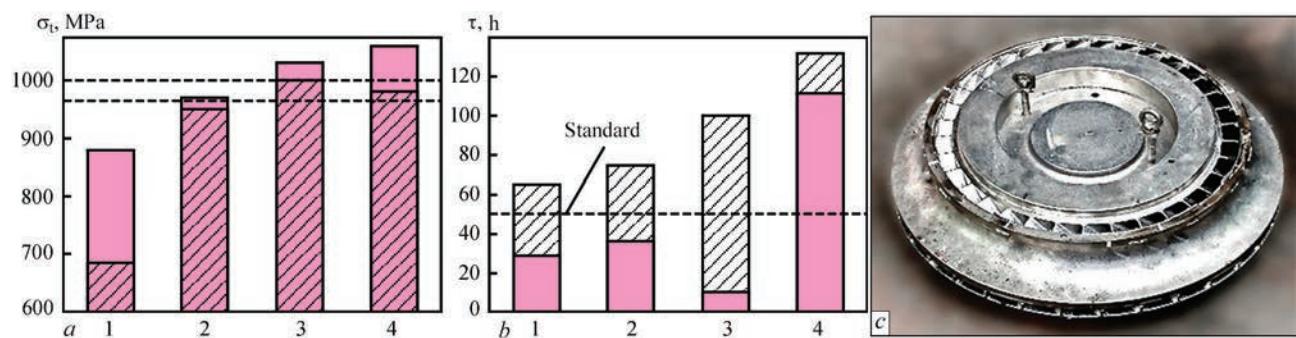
Tensile strength of butt brazed joints (a) produced using filler metals of the system: Ni–Pd–Cr–Si (1); Ni–Pd–Cr–Co–Si (2); Ni–Pd–Cr–B (3); Ni–Pd–Cr–Ge (4); long-term strength (b); double shrouded centrifugal wheel of axial flow compressor of gas-turbine engine (c)
